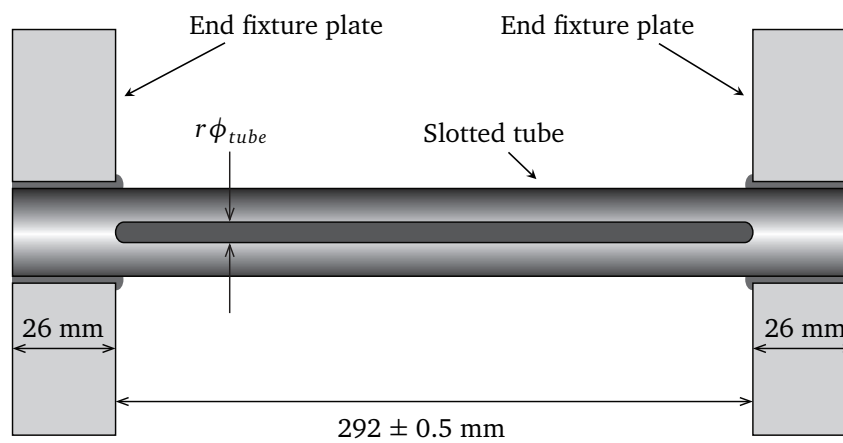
Cross-sectional profile view of a slotted tube specimen potted into a pair of end fixture plates for restrained torsion (warping) tests. This figure shows the relevant dimensions of the tube specimen and surrounding fixtures necessary to ensure that the designed effective warping length is achieved.
